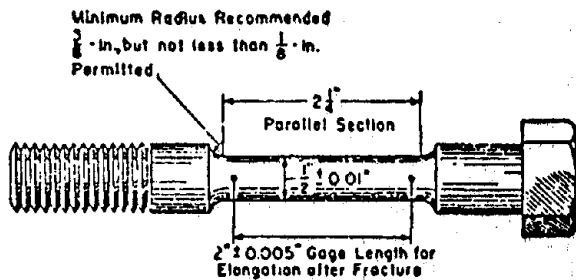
Tension Test Specimen for Bolt with Turned-Down Shank
